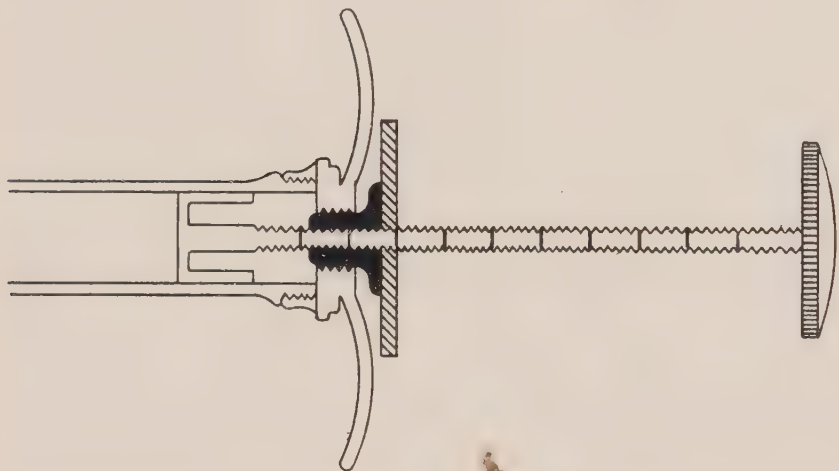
SECTION OF HIGH-PRESSURE ALL-METAL SYRINGE WITH ADJUSTABLE FIXING SCREW. (Cathcart.)
